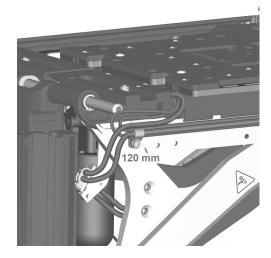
The cable loop between the upper and lower cable bracket should be $5^{\prime\prime}$.
